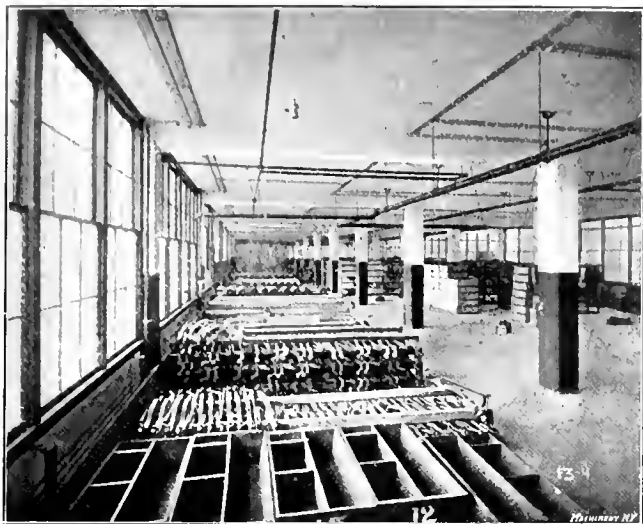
View of Stock Room, showing Trucks in which Parts are taken to the Assembling Room, Assembled Parts, and Bins in which Smaller Parts are Stored
